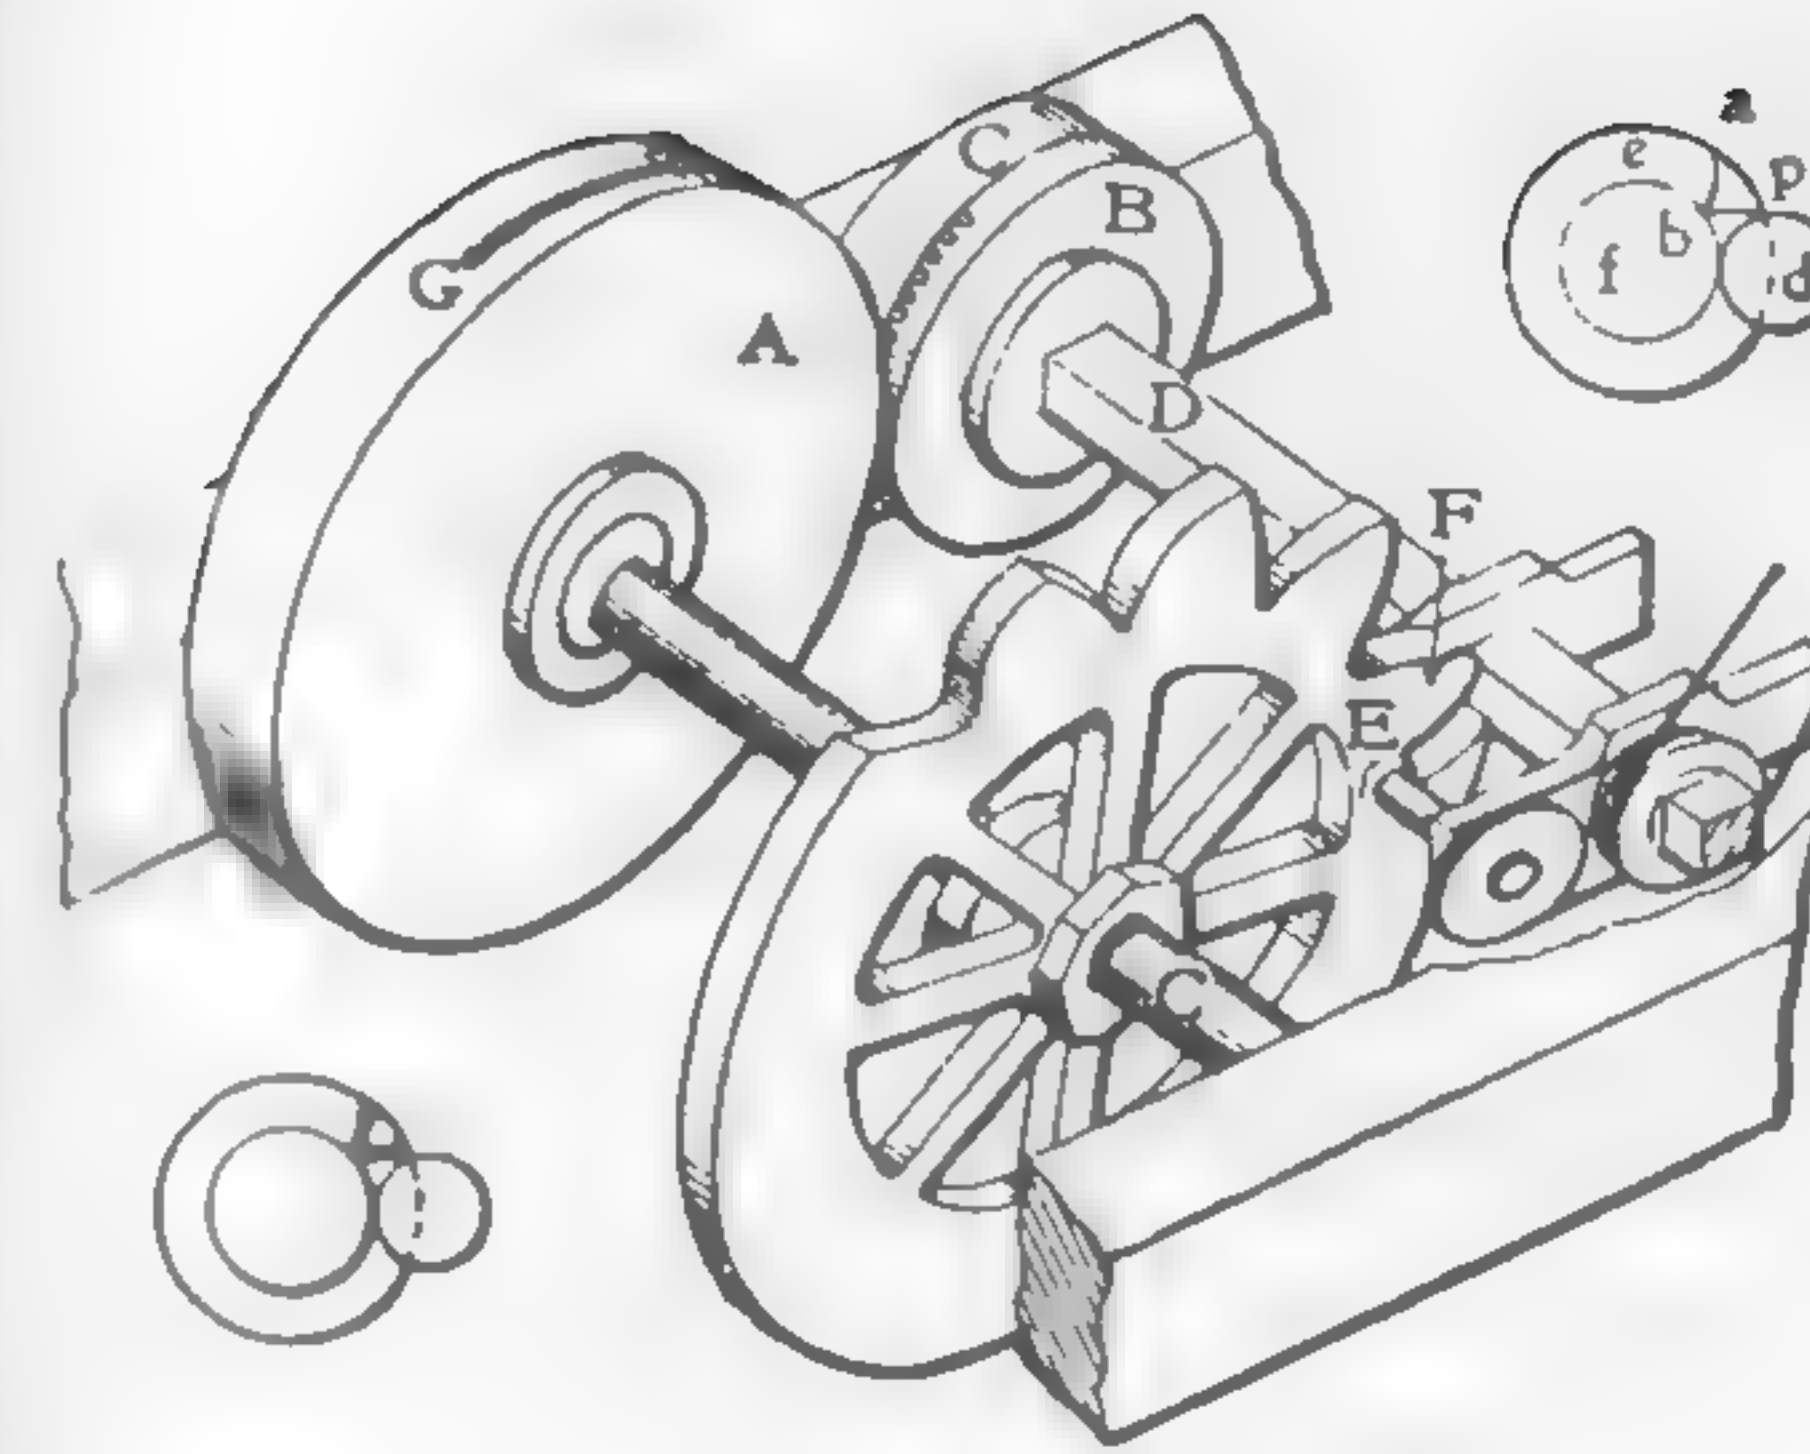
BASHWORTH'S GEAR-GENERATING MACHINE, 1842
